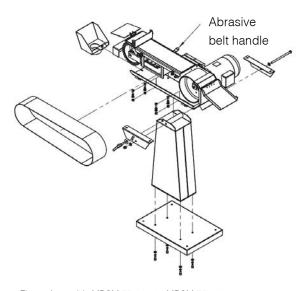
Assembly MBSM 75-240-1 , MBSM 75-240-2 , MBSM 150-240-2
